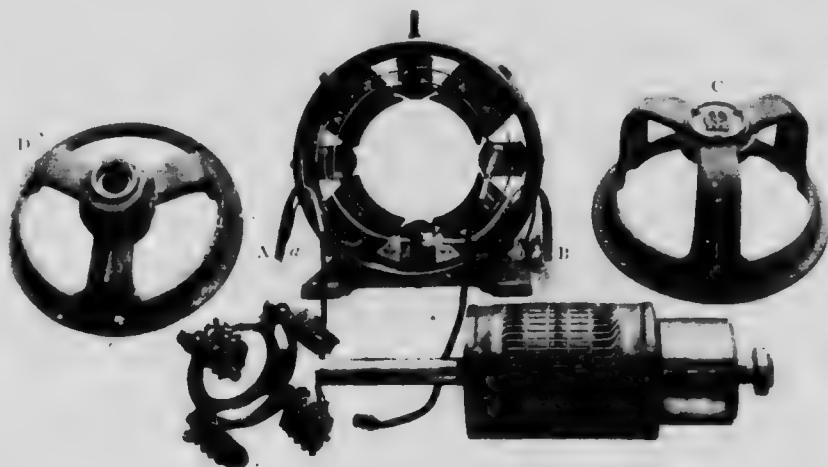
Details of Mather & Platt's "P"-Type Motors.
